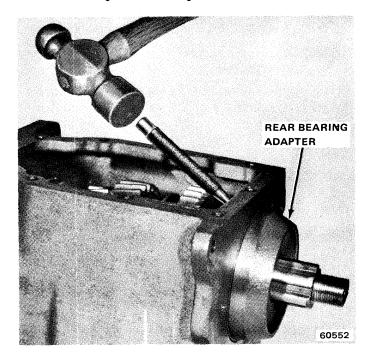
Removing Rear Bearing and Adapter Assembly
